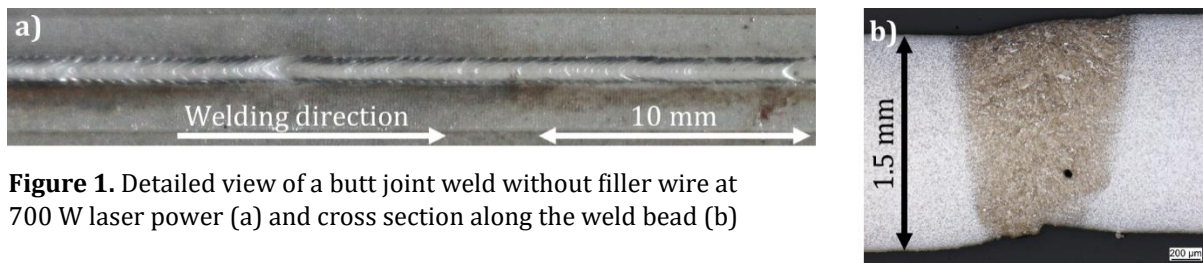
Detailed view of a butt joint weld without filler wire at 700 W laser power (a) and cross section along the weld bead (b)
